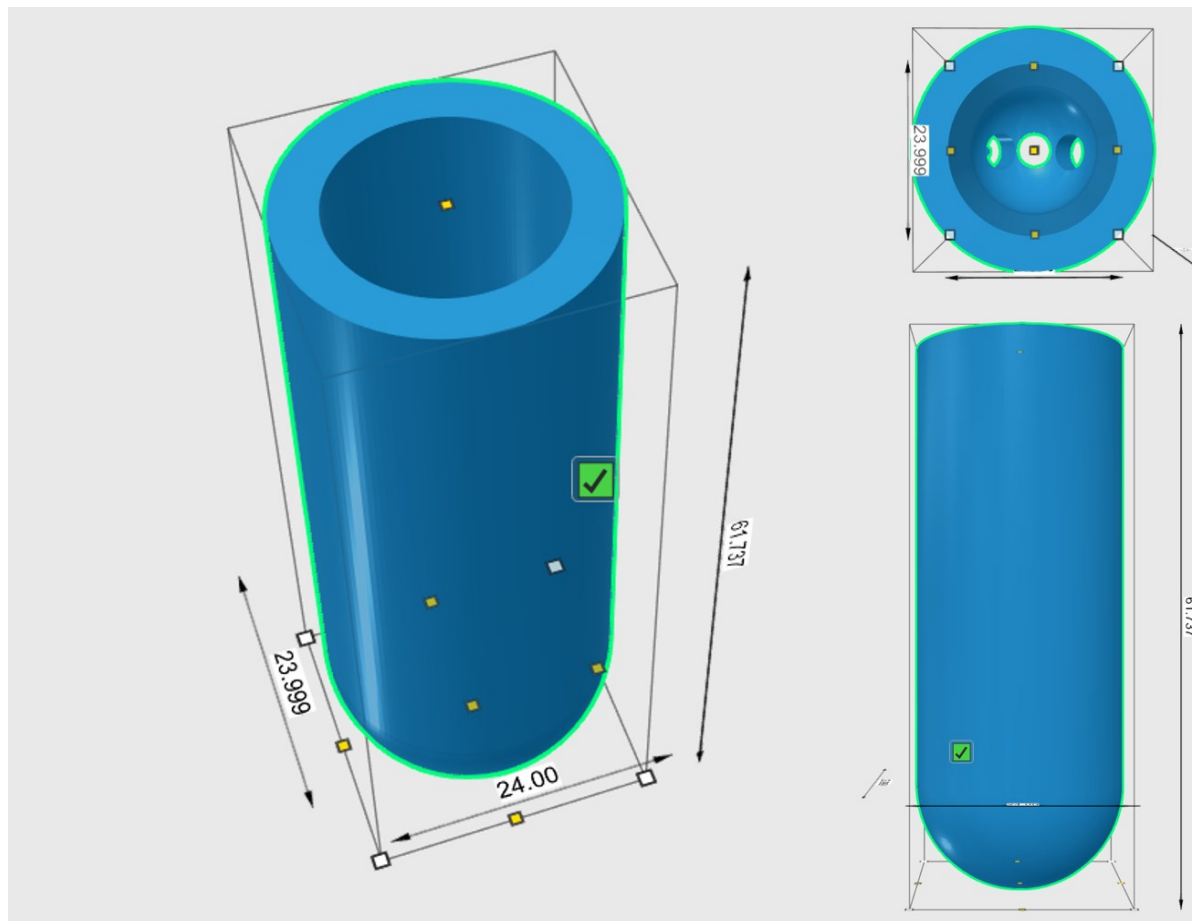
Design of the 3D printed sample holder for fiber optics and a Schlenk flask.
